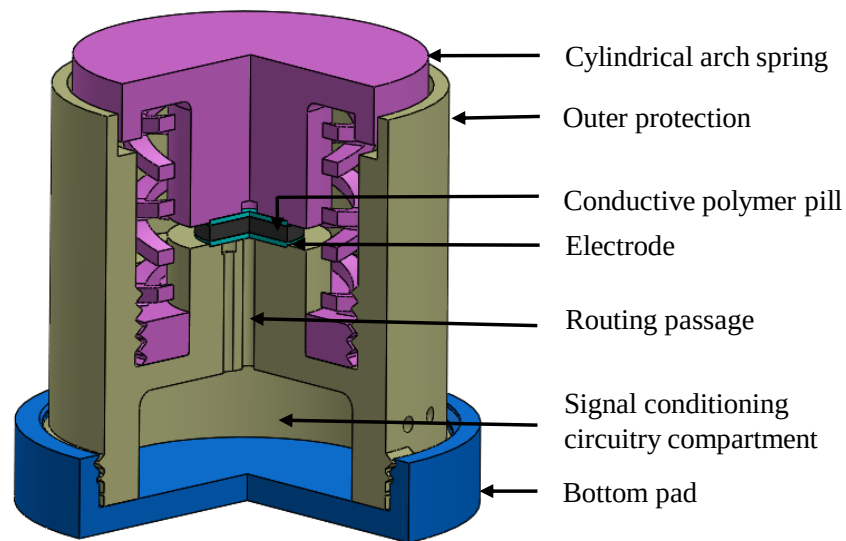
Half sectional view section of the proposed tactile force sensor design.
